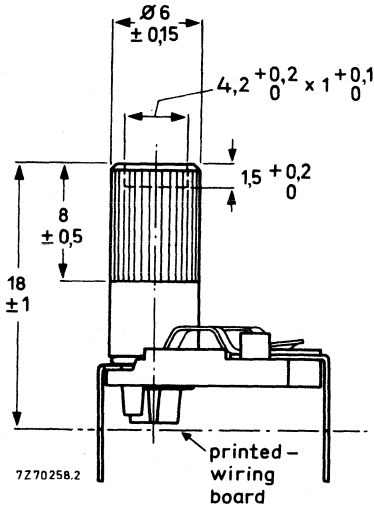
Test switch for horizontal mounting with adjustment knob at the side of the selector contact.
